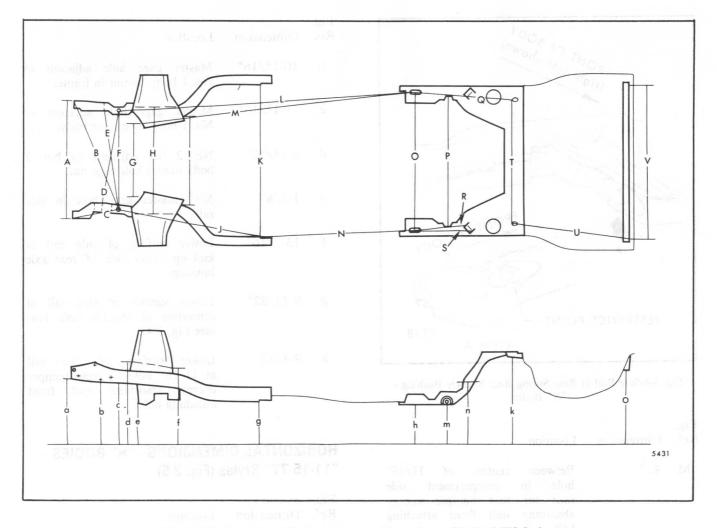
Horizontal and Vertical Checking Dimensions - "H-11-15-77" Styles
